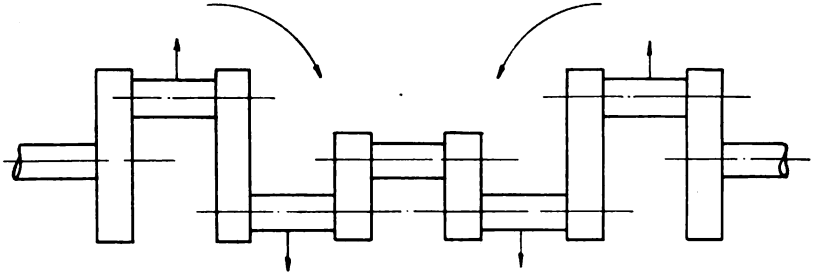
Four-cylinder crankshaft balanced for centrifugal forces.
